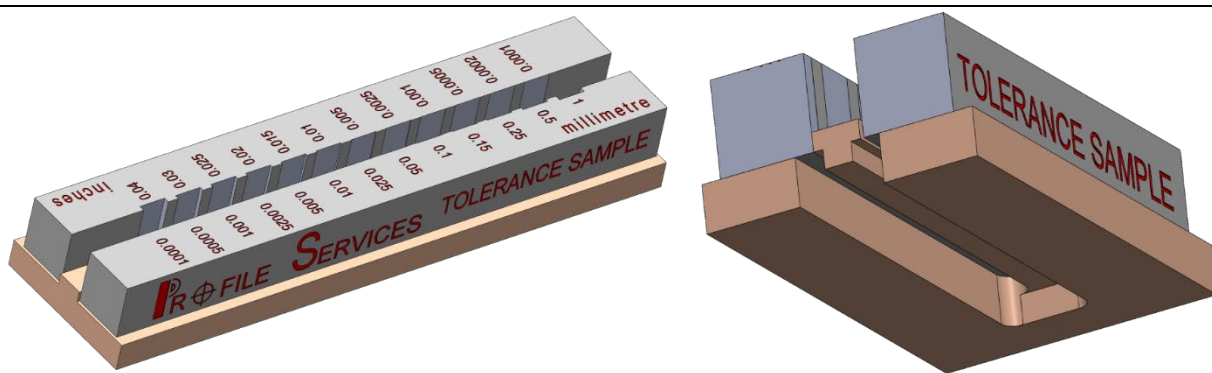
Tolerance demonstrator – Concept 1 (section view shown on right)
